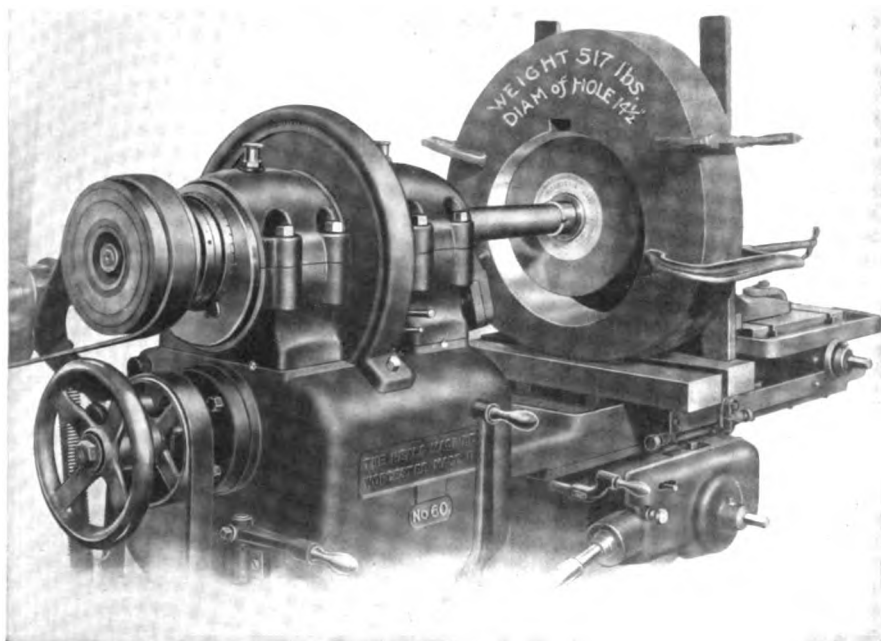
Grinding $1\frac{1}{2}$ " Hole in Large Hardened Steel Cam
